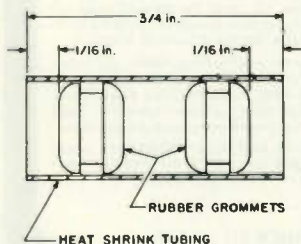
Cutaway view showing placement of grommets in heat-shrink tubing.
